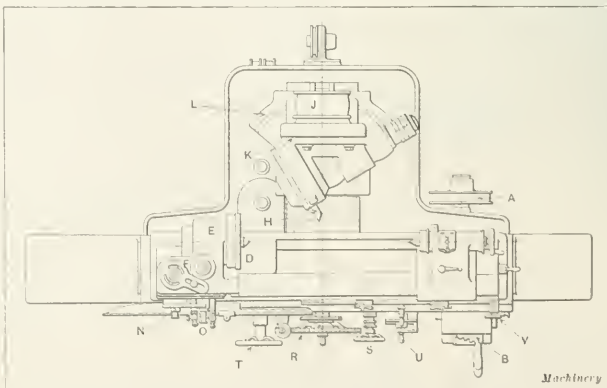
Plan View of Worm Grinding Machine shown in Figs. 1 and 3
